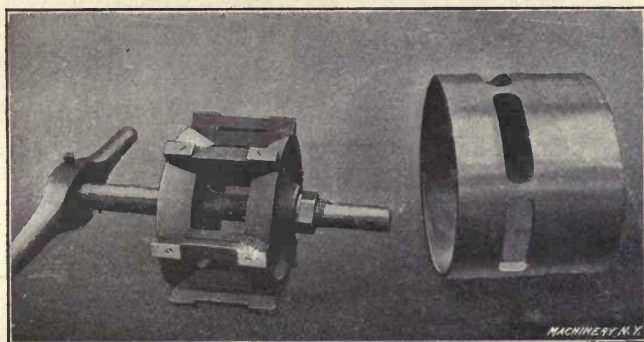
Steam-chest Bushing and Expanding Mandrel
